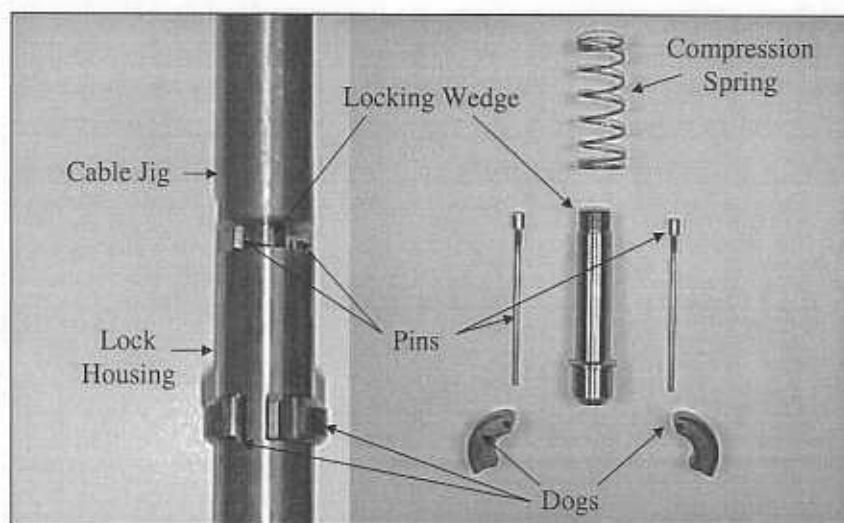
Photographs of assembled locking mechanism and individual components.
